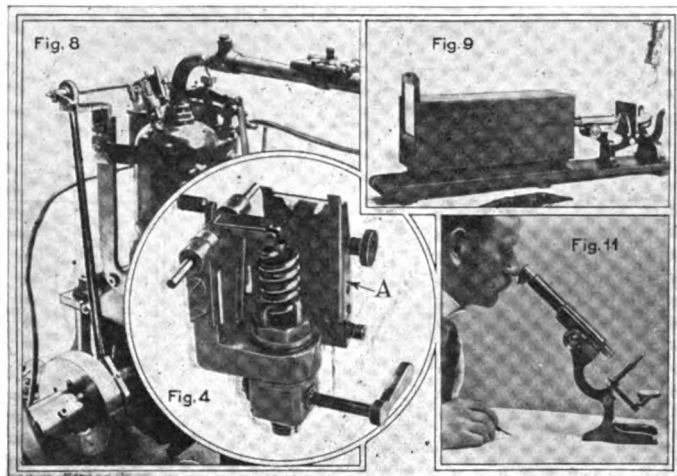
Photographic view of complete Micro-Indicator. Fig. 8—Micro-Indicator applied to single cylinder vertical engine. Fig. 9—Camera used with Micro-Indicator. Fig. 11—Microscope with Leitz drafting ocular applied.
